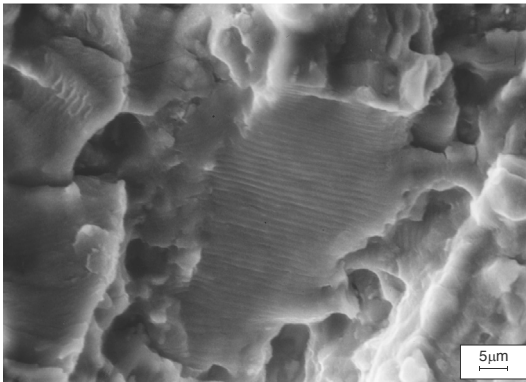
Morphology of the fracture surface in the deformed 6082 alloy. Typical traces of fatigue cracking are shown
